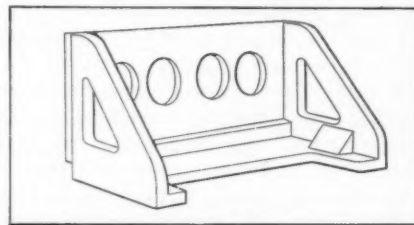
Four-cylinder casting, can be handled as easily as a single hole
